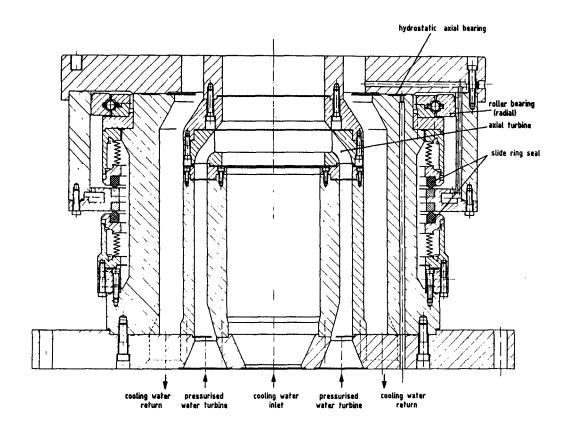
KLA type II for cooling water supply, support bearing and drive of target wheel (hydrostatic axial bearing, radial roller bearing and axial turbine as drive)
